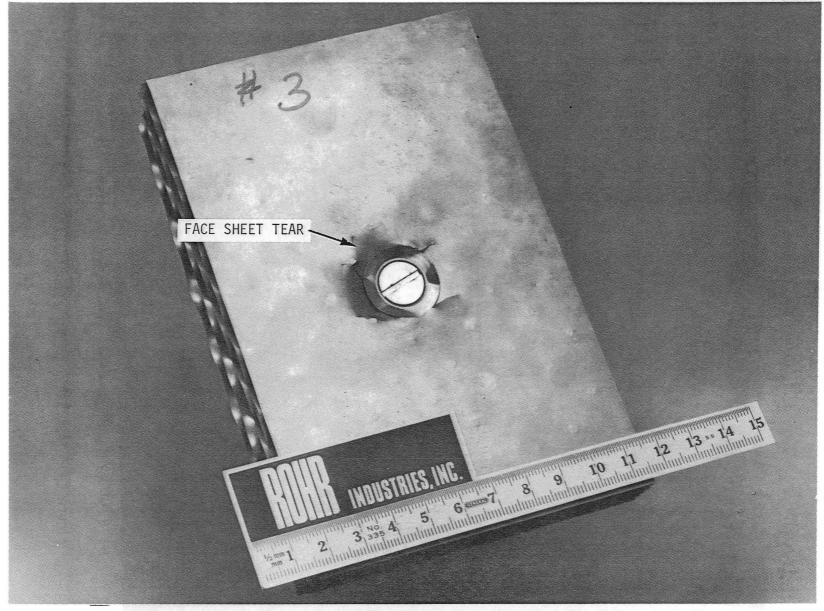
Typical Outer Face Sheet Tearout and Internal Panel Damage Failure Mode
